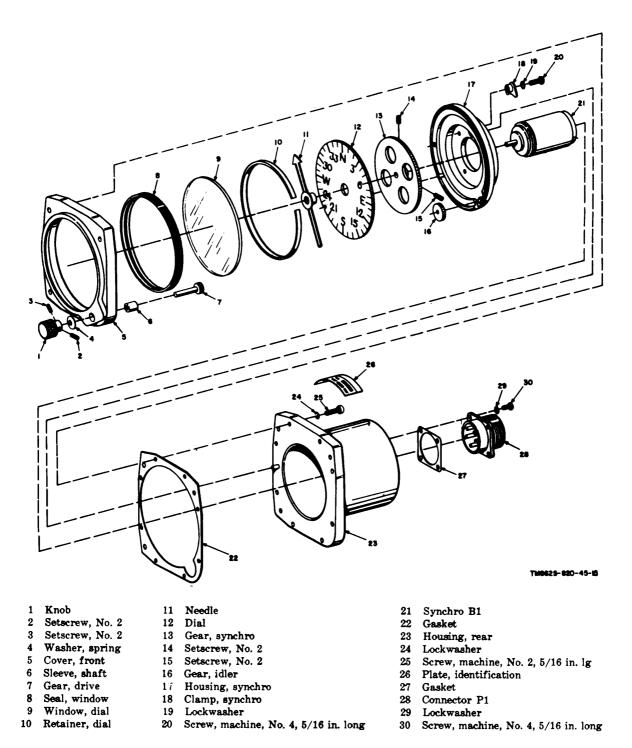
COMPASS SIMULATOR Indicator, exploded view.
